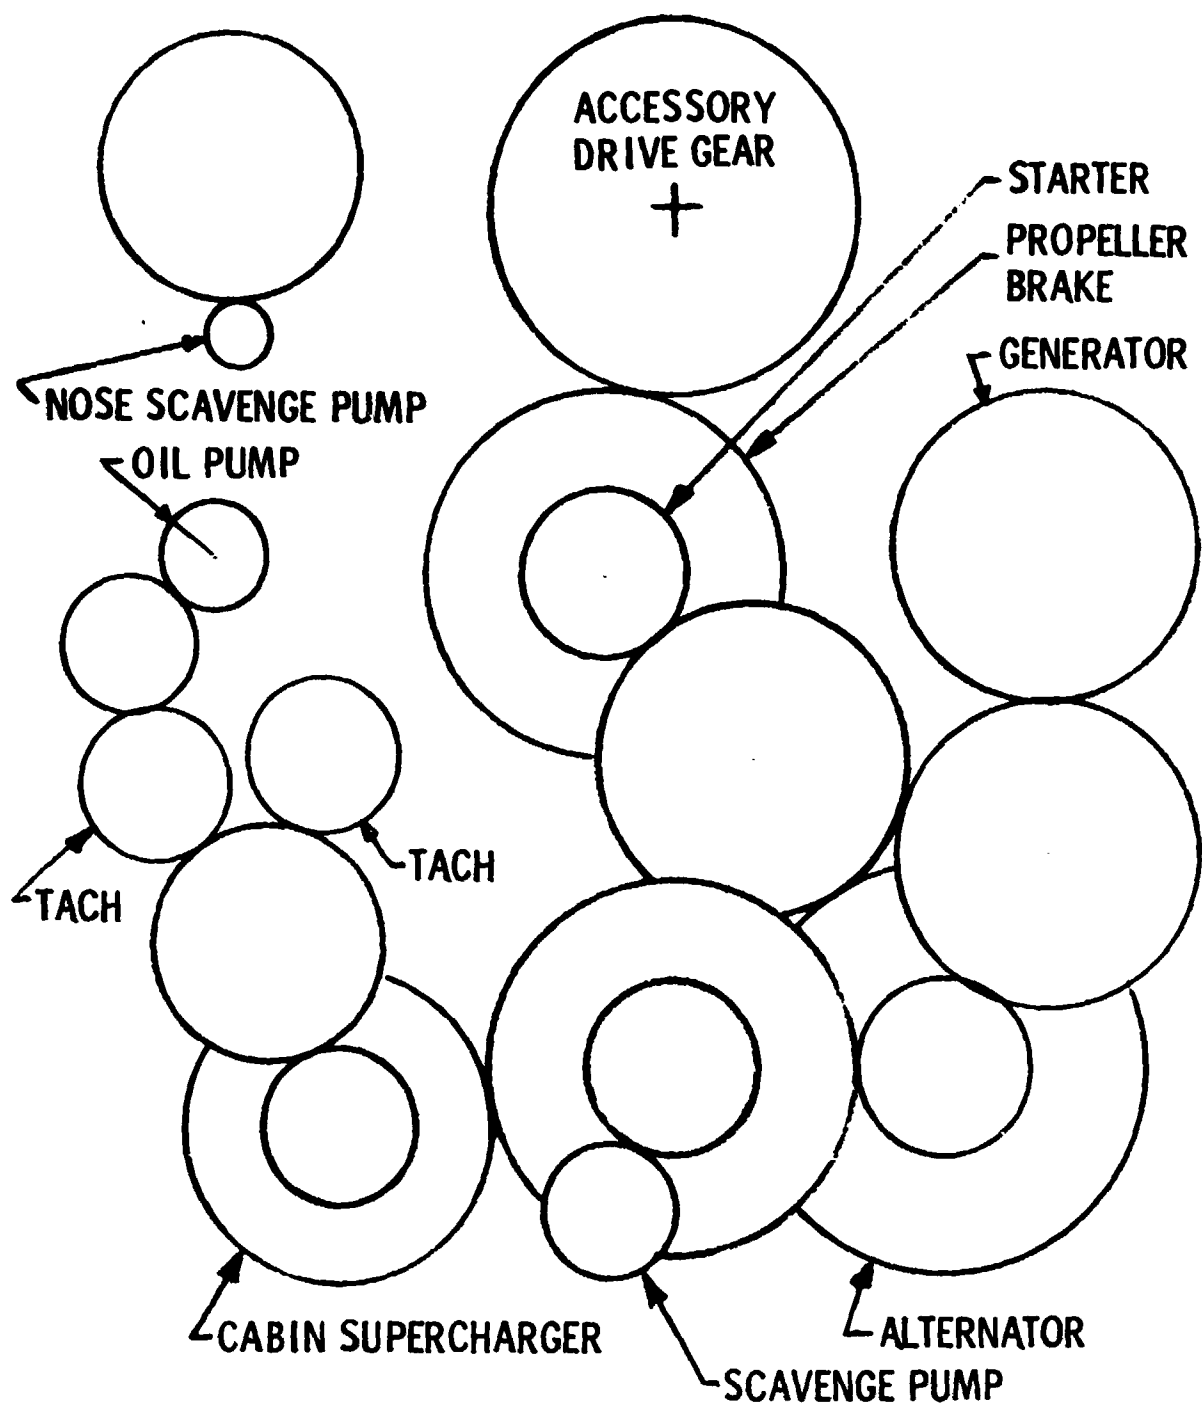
501-D13 reduction gearbox accessory drive train.
